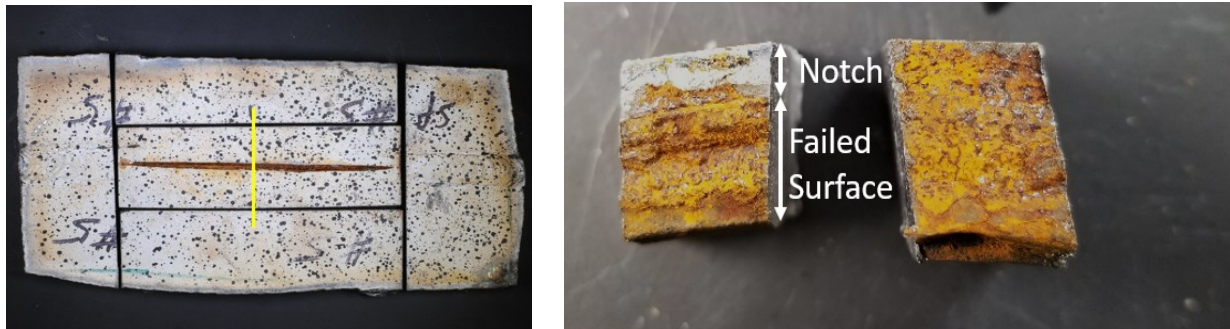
Photos of sample 5 showing though crack covered in corrosion products, the failed surface appears to be ductile fracture.
